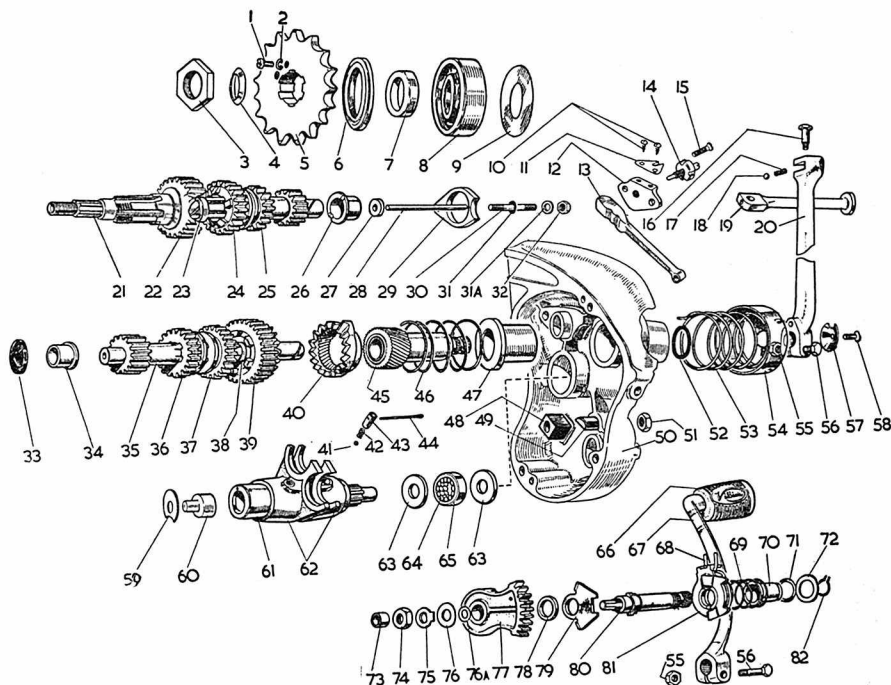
Exploded view typical of four speed transmission used on Mark 2L, 9E, 31C, 31A, 32A, 33A and 34A.
